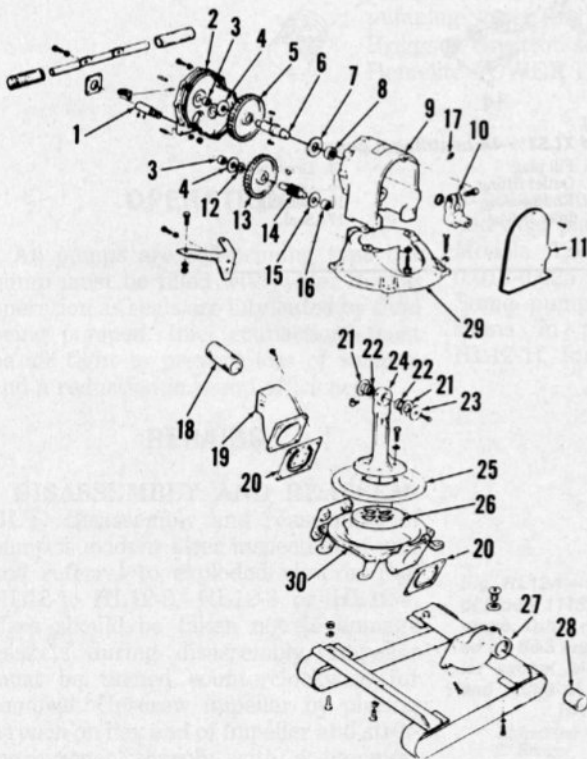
Exploded view of 111DP2-1 diaphragm pump.
